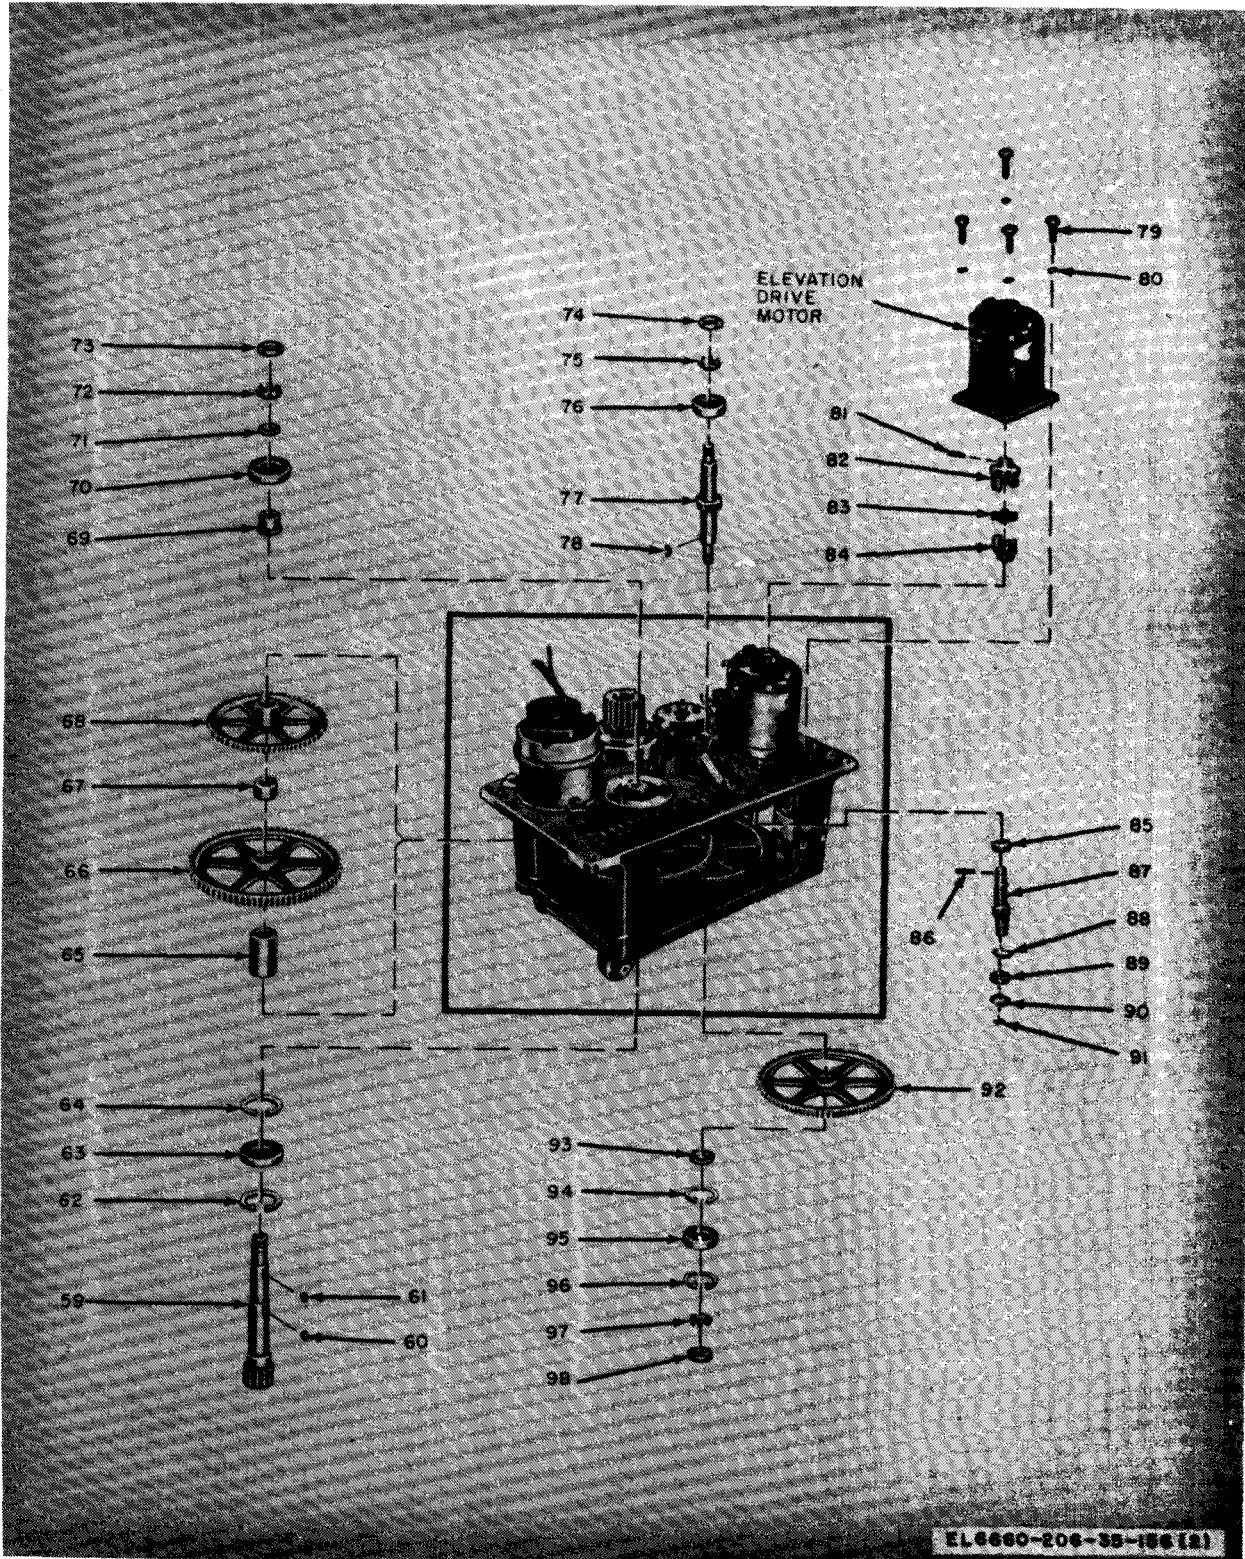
(2) . Elevation drive assembly, exploded view (sheet 2 of 2).
